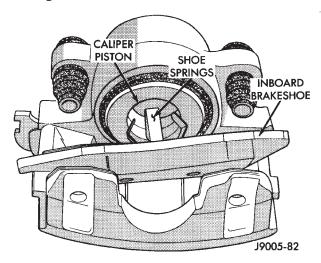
Inboard Brakeshoe Removal unseat dust boot and force dirt into piston bore.
